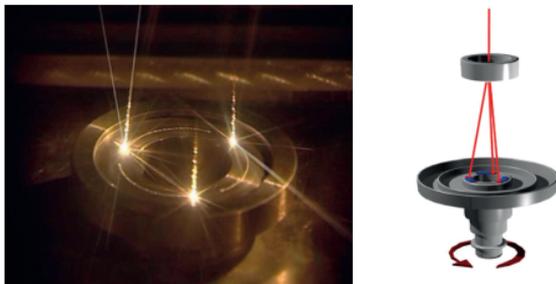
Welding an axial weld with three pools and moving beam (left). Model of welding an axial weld with three pools and moving workpiece (right).
